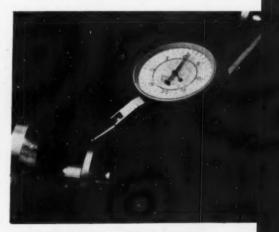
The outside diameter of the gear blank must be concentric within 0.0001 inch.
